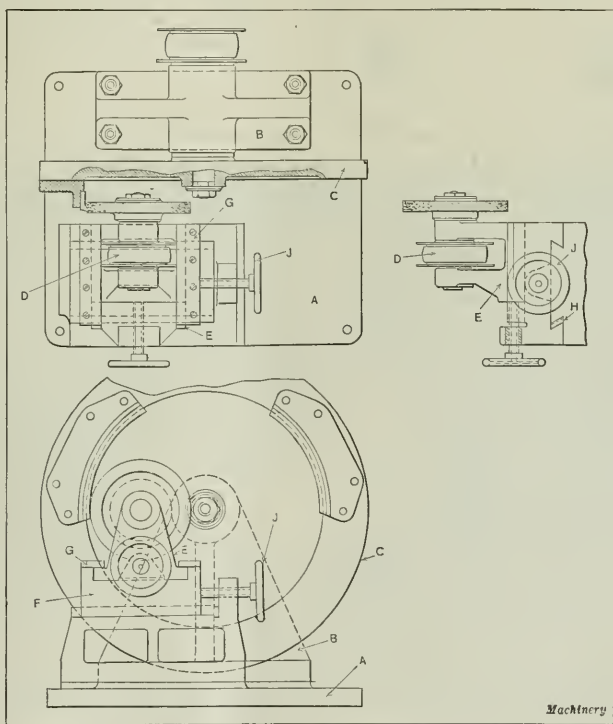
Design of Fixture in which the Lower Die Blades are ground
